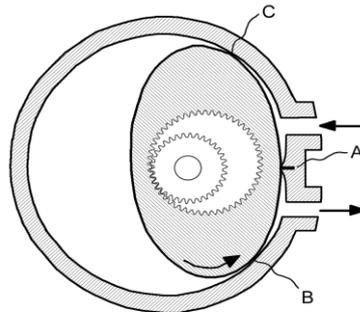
Axial view of a *hypotrochoidal* type rotary piston vacuum pump
